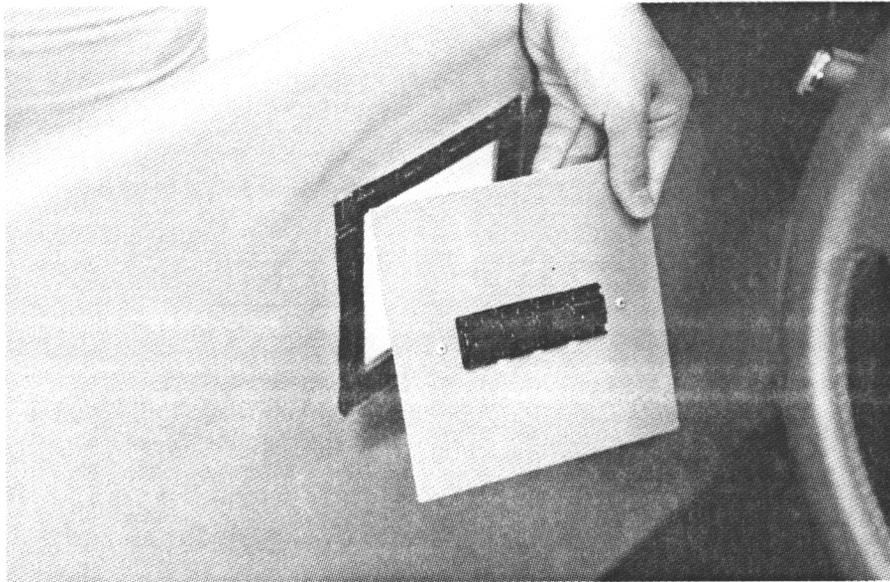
Control mounting area on driver door panel shown with typical control being removed.
